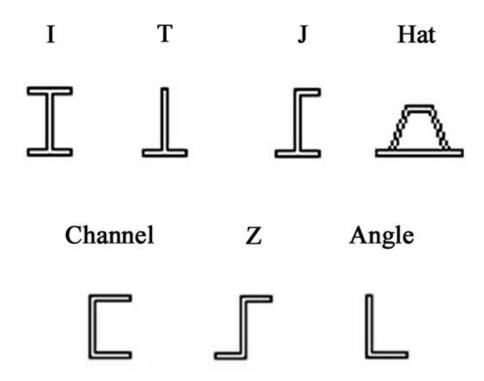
Common Laminated Composite Beam Cross-Section Shapes
